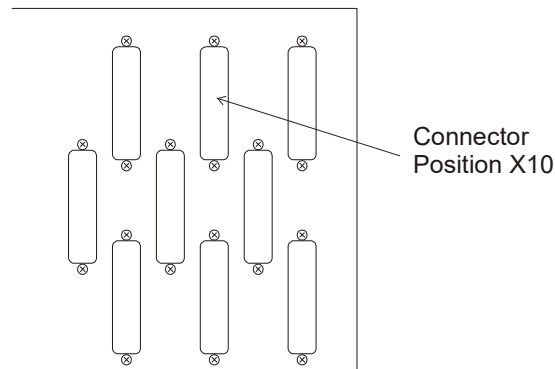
Upper right corner of rear panel of chassis housing, showing location of connector cutouts. X10 is the 2nd connector from the right in the top row.
